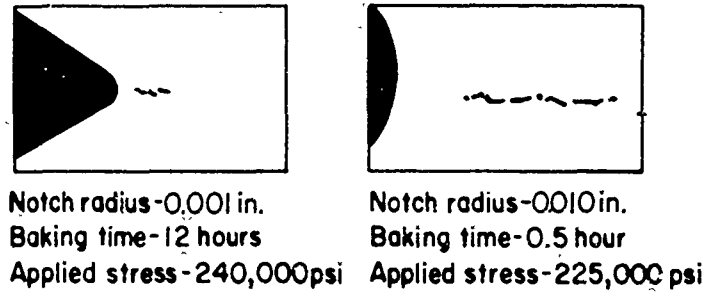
CRACKS OBSERVED IN NOTCHED SPECIMENS SECTIONED AFTER STATIC LOADING<sup>(49)</sup>
